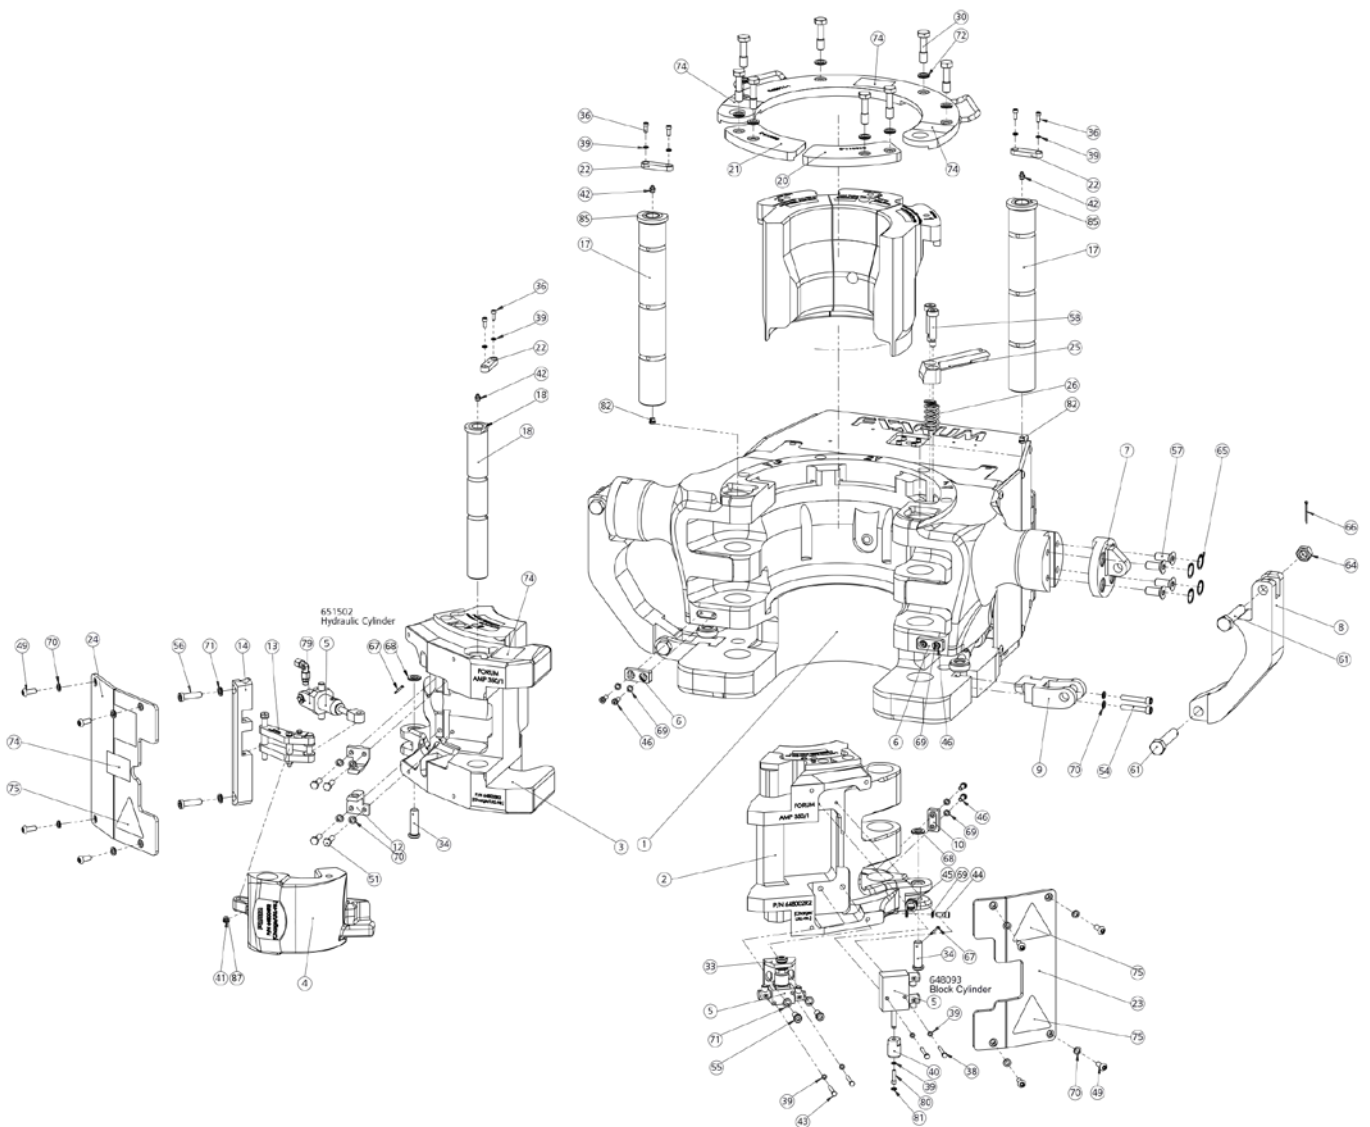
638100-Y-350 (AMP®-350/1) Drawing I
